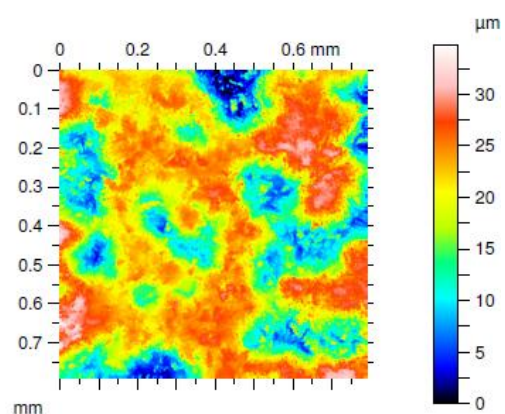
Surface of the polymer valve cover obtained from interferometry technique.
